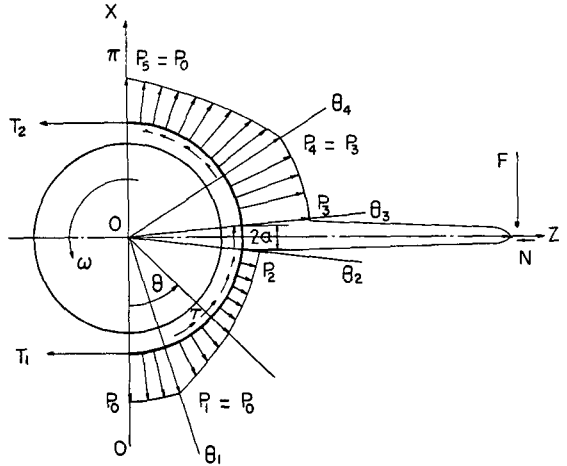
Diagram of abrasive belt for a driver pulley contact wheel
